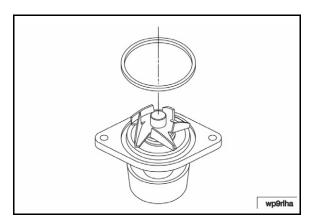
CLEAN THE O-RING SEALING SURFACE
